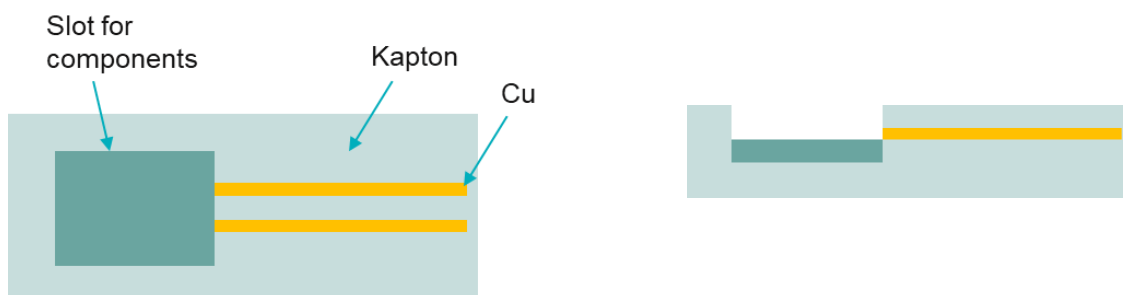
Top and side-view of the flexible PCB design for integration of printed sensors.
